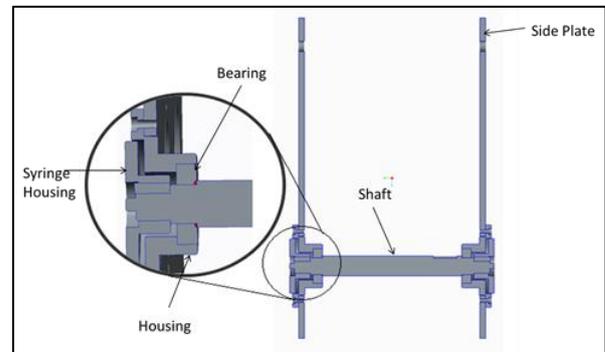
Creo Model of Head Assembly of Syrup Filling Machine
